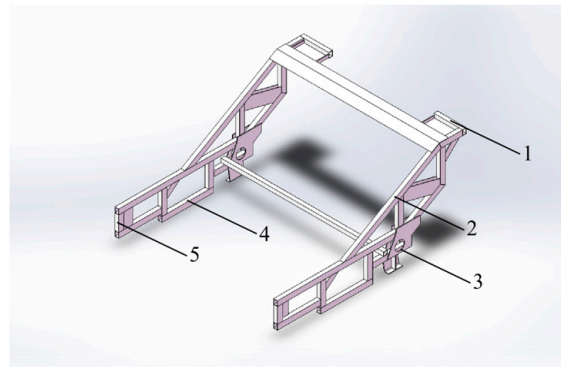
The schematic diagram of load application positions: 1. Baling machine bearing seat, 2. peel-off roller bearing seat, 3. transport roller bearing seat, 4. picking support side plate, and 5. straw grinder connection hole.
